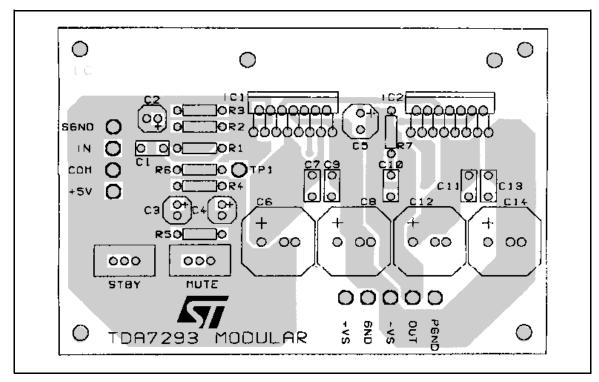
Modular Application P.C. Board and Component Layout (scale 1:1) (Component SIDE)
